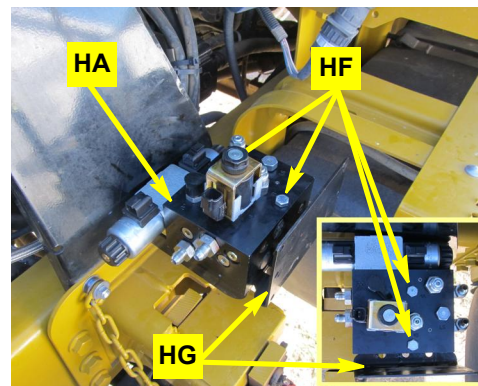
with inset: Installed steering block and steering controller mounting bracket
